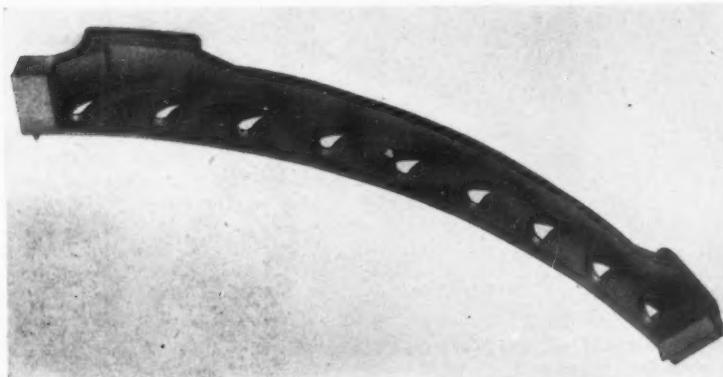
This outer flange segment for holding gas turbine nozzle guide vanes is cast in Nimonic alloy
